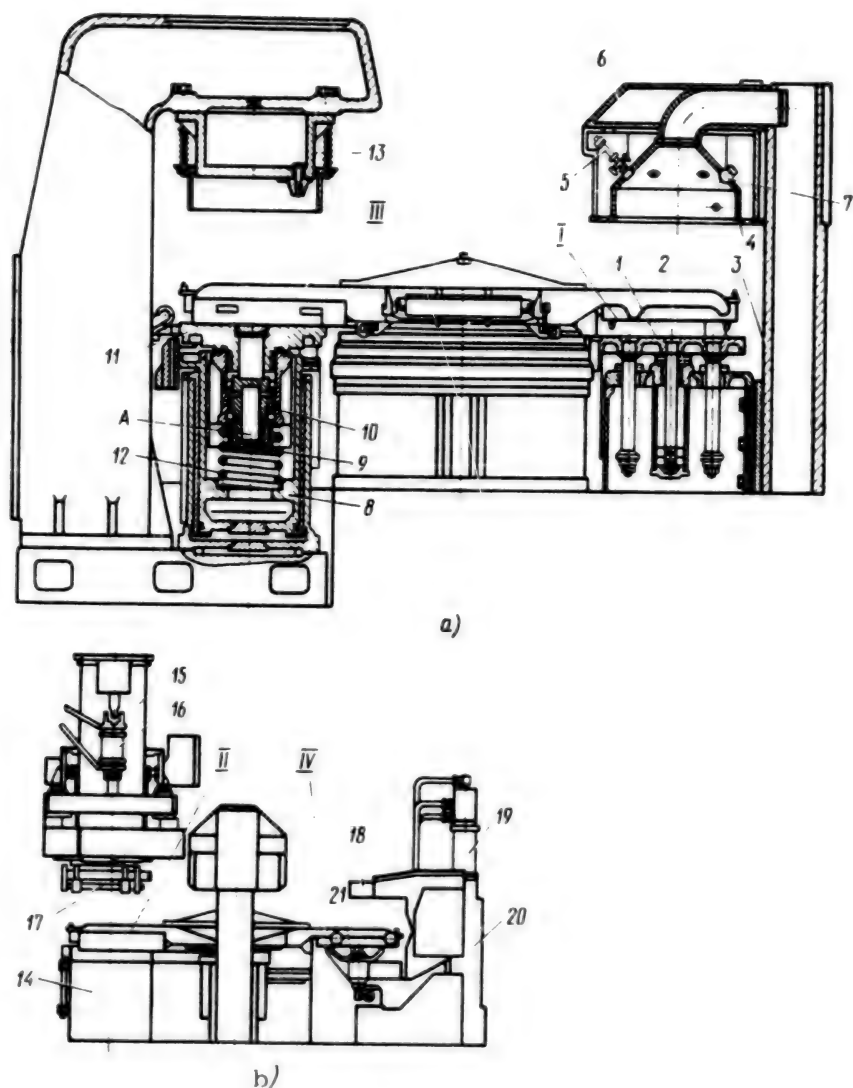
Four-Position Turret Automatic Molding Machine With Combination Packing Process:
